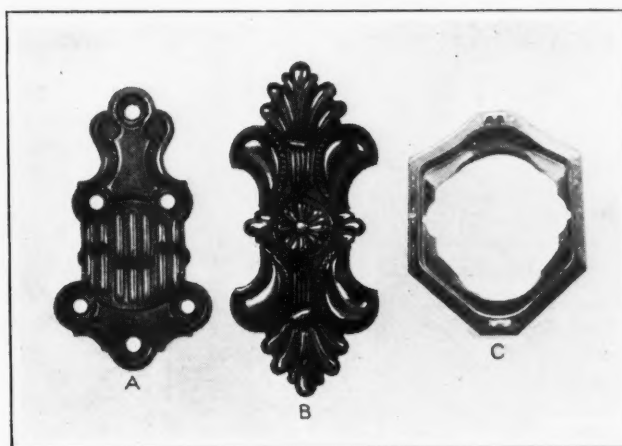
Examples of Intricate Work produced on Knuckle-joint Embossing Presses
